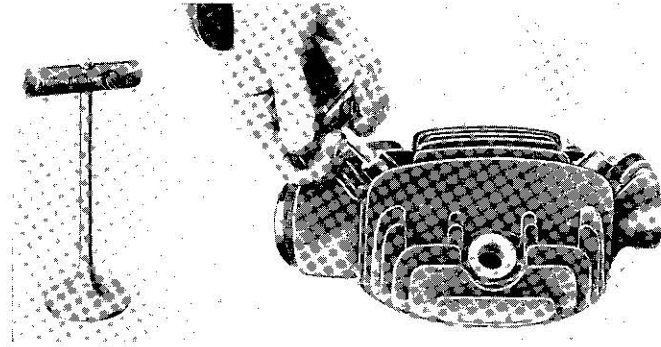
USING THE A.J.S. VALVE GRINDING TOOL
